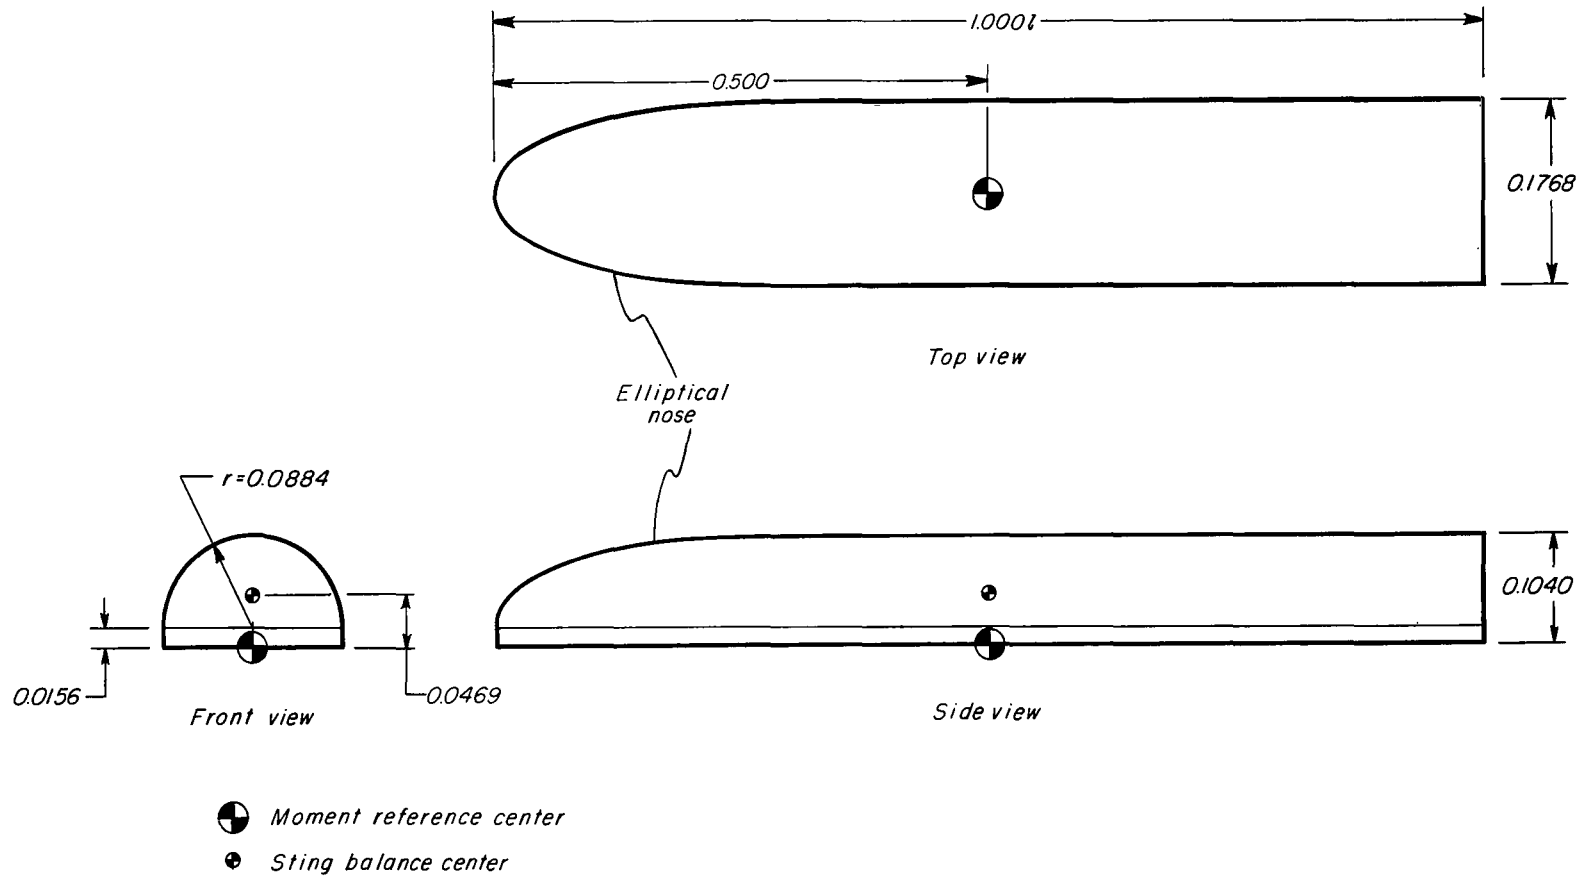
Drawing of half-circle (short extended sides) cross-section configuration. All dimensions based on vehicle length, $l = 72$ inches (183 cm).
